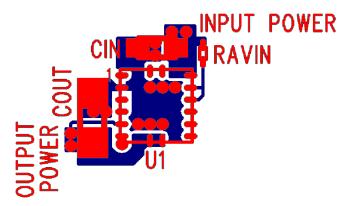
Top PCB Layer Critical Components and Copper for Minimum Footprint (Top View)
